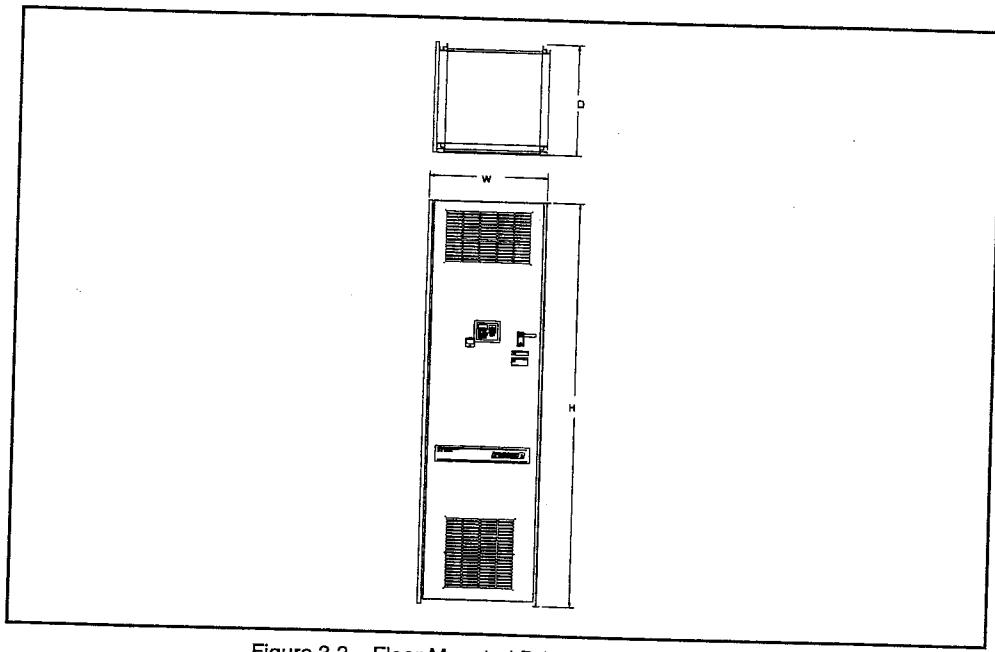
Floor Mounted Drive-Only Dimensions
